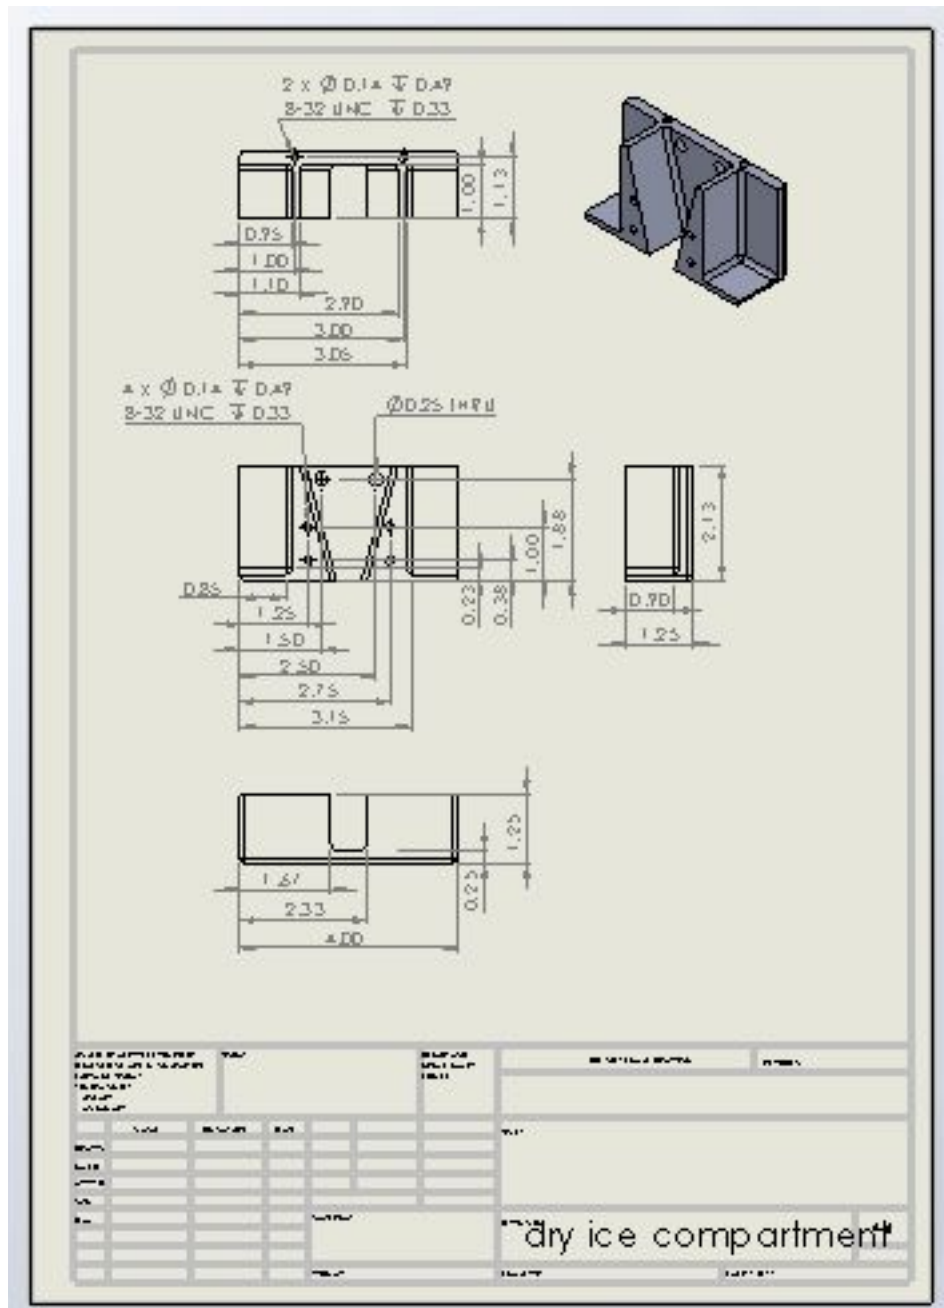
Dimensioned drawing of dry ice compartment for ligament attachment fixture.
